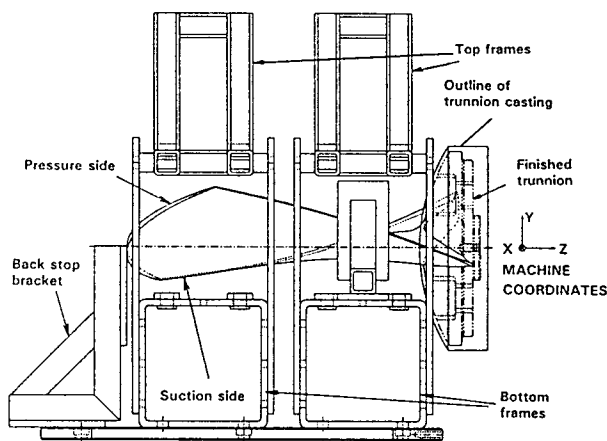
TRUNNION MACHINING FIXTURE (side view)
